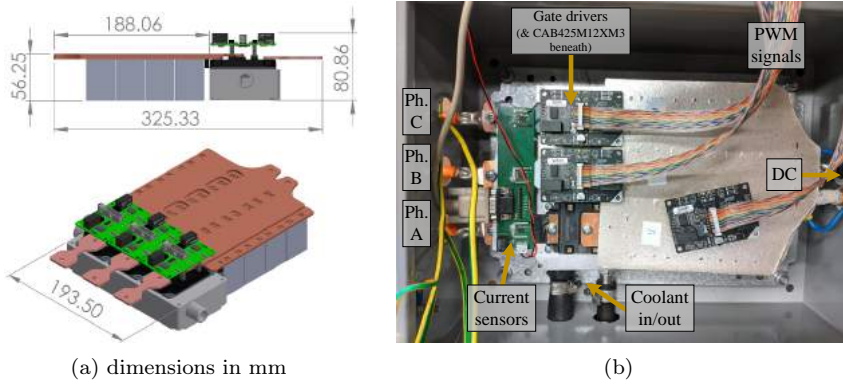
Prototype SiC inverter with XM3 half-bridge power modules: (a) CAD drawing showing its outer dimensions and (b) the final assembled inverter
